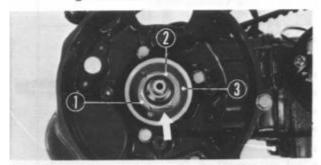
① 22 mm lock washer ② Timining pulley ② 22 mm lock nut
